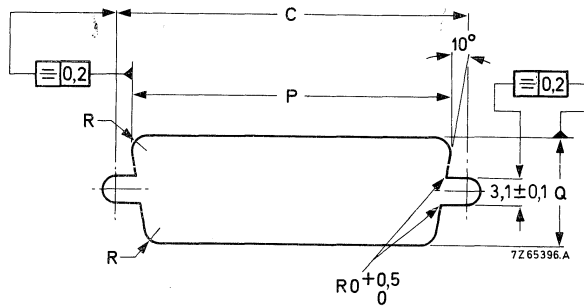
Front mounting; see Table 5 for dimensions C, P, Q and R.
